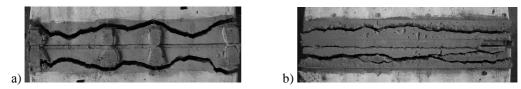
Appearance of samples after the tests: a) improved joint platform; b) joint platform with uniform pressing
